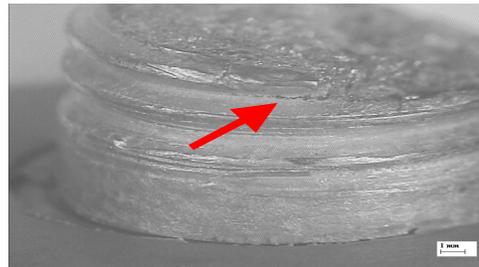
Stereo photographs showing cracks near the thread root and on the surface of the thread in the fork end.
